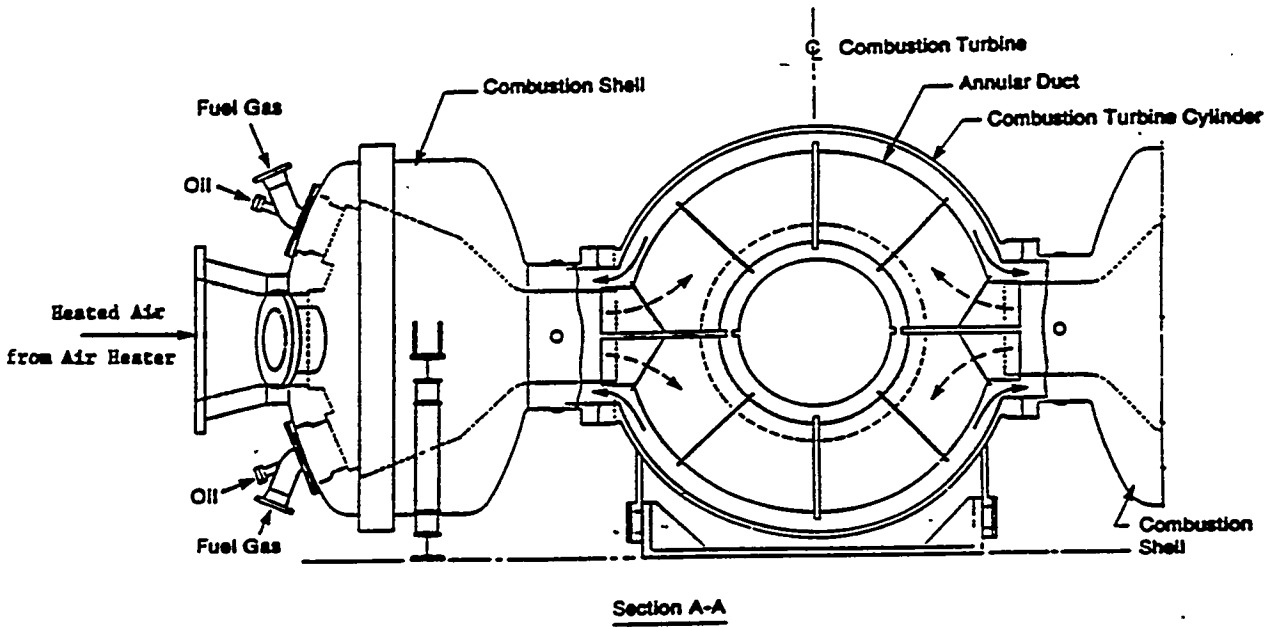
Topping Combustor/Combustion Turbine Arrangement
